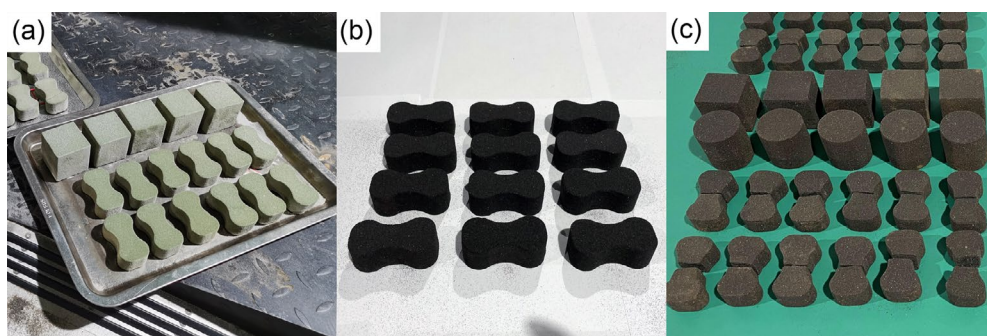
Sand mold samples after printing: (a) initially taken out of the sand box; (b) after post-processing; (c) after test
